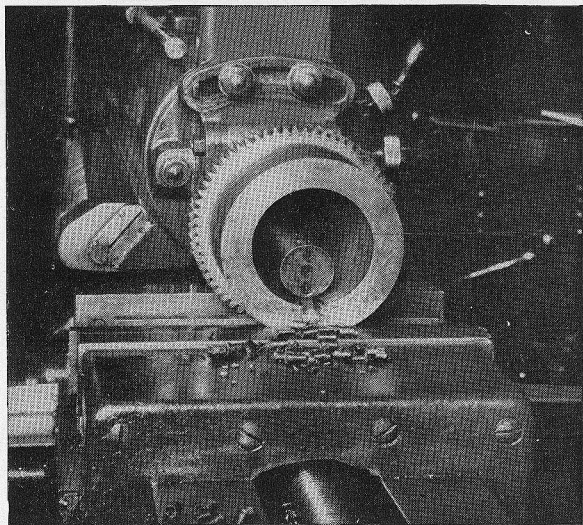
Cutting a keyway in a ring gear. (*The Cincinnati Shaper Company*)
